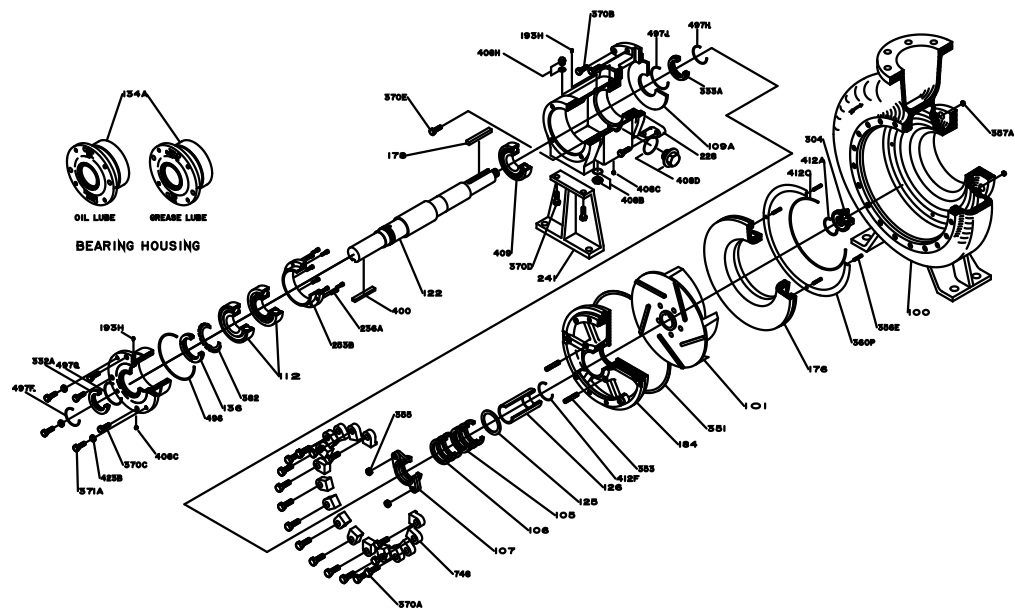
Exploded view of 3180 and 3185 S, M, L, and XL groups
